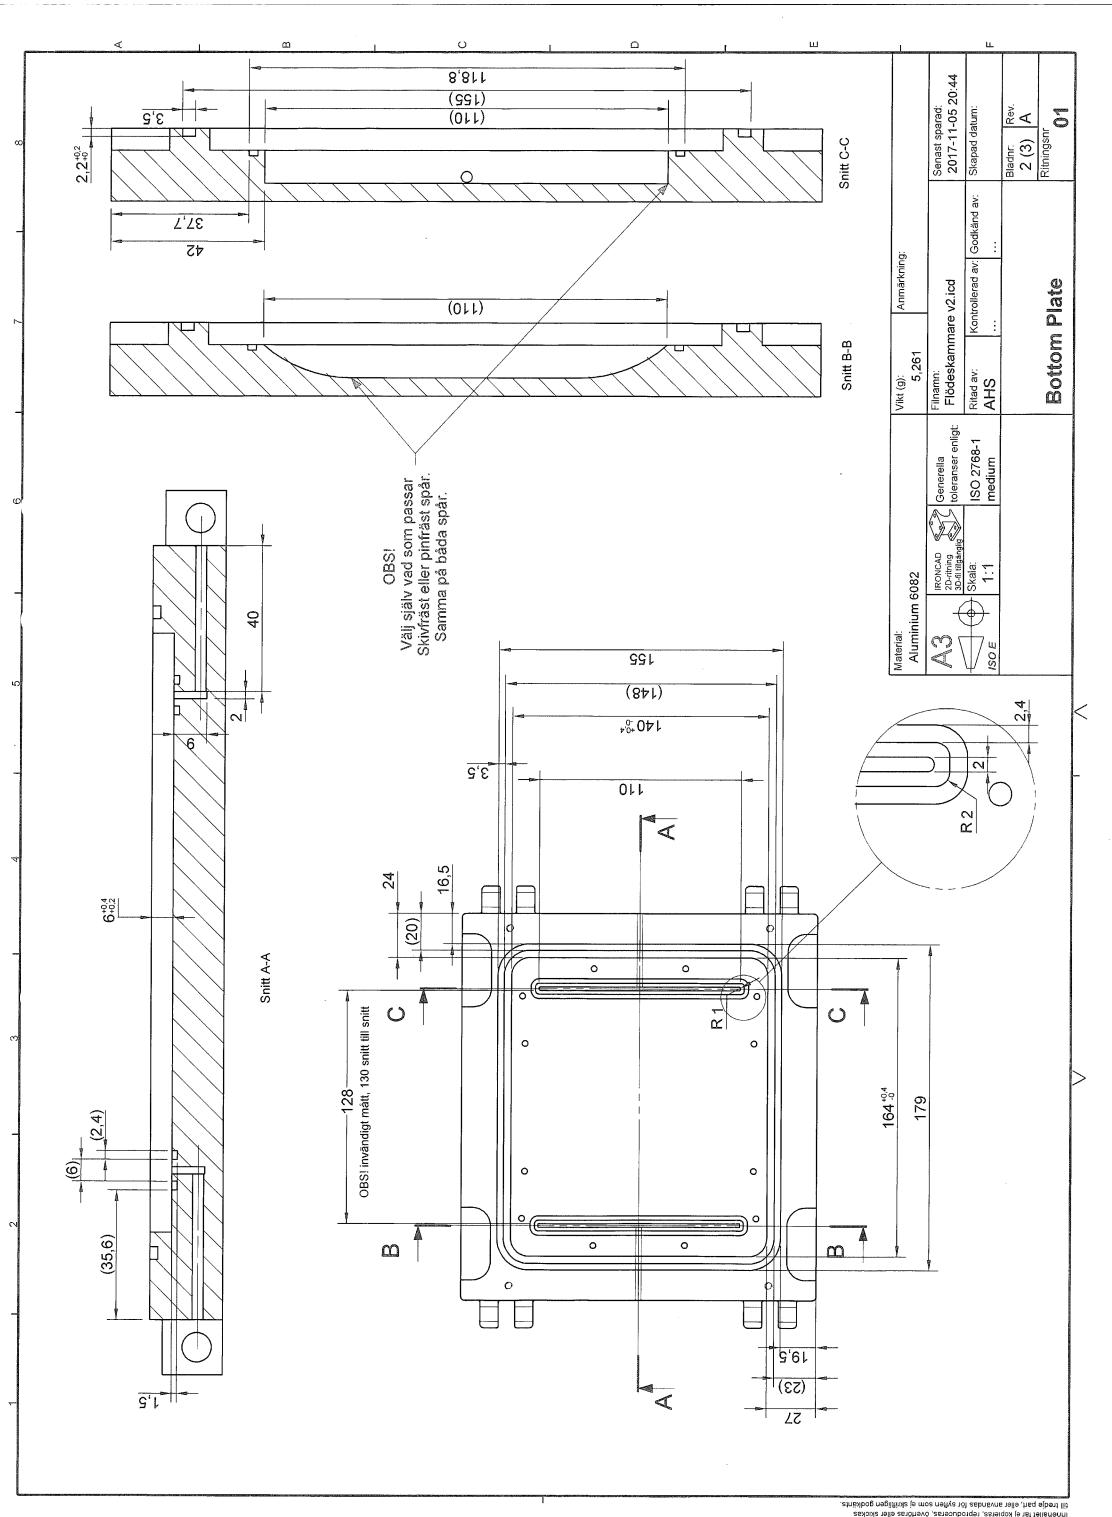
Technical drawing 2 (of 3) of the SVA chamber body. Distances are given in mm.
